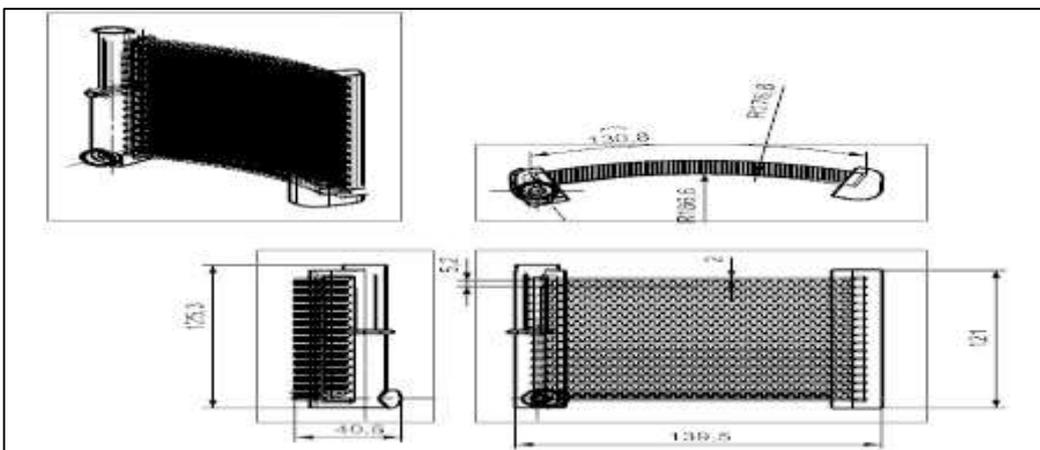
Curved Plate Heat Exchanger Microchannel Design and Dimensions
